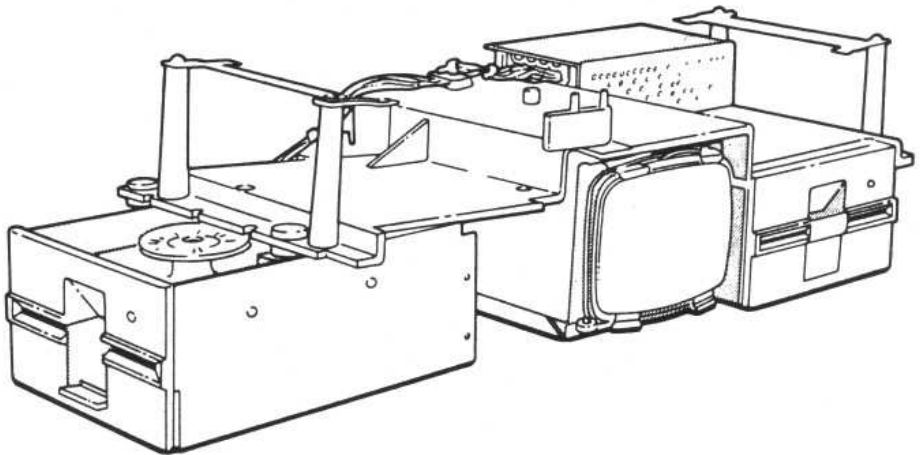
"B" DRIVE DISASSEMBLY
